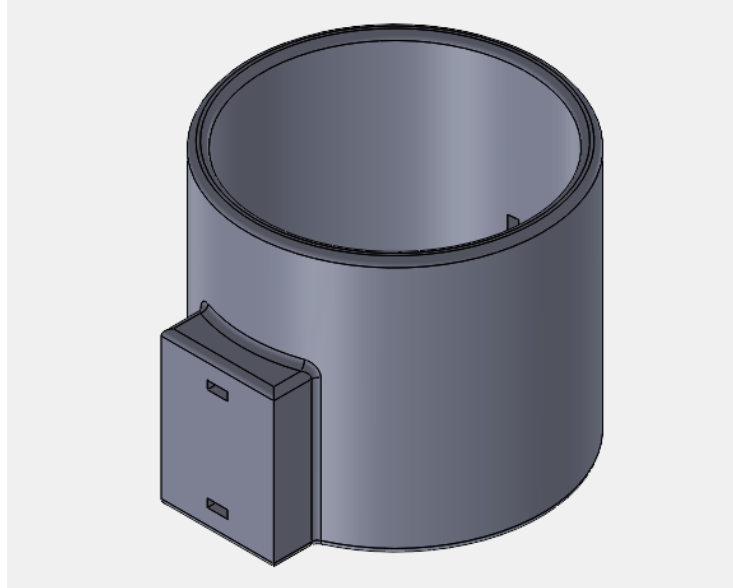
Ripstop Continuation Build CAD Model - Assembly
